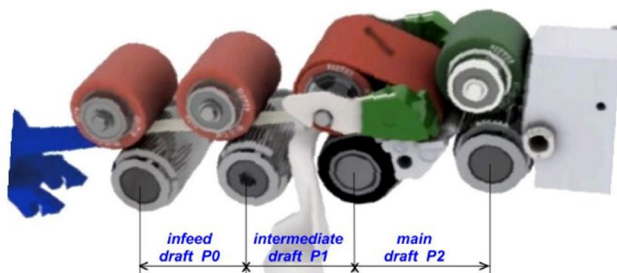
Scheme of drafting device of air-jet spinning machine (adapted and reproduced [17])
